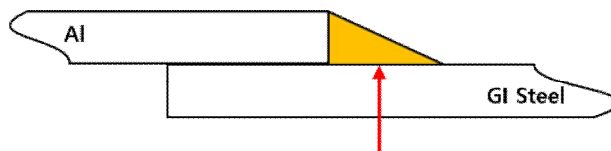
Temperature measurement position of welded joints by k-type thermocouple
